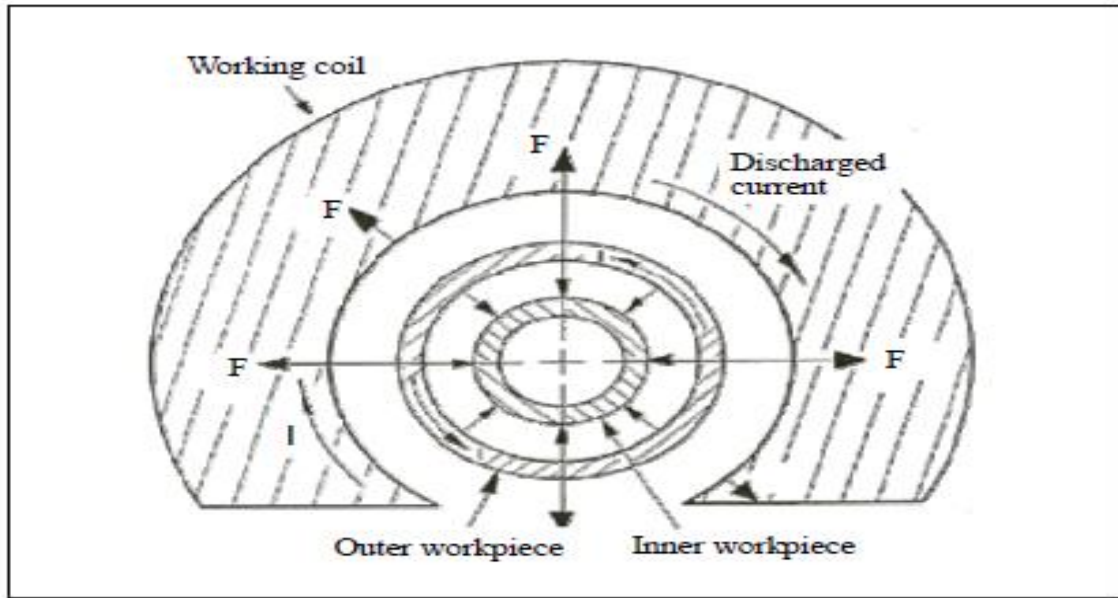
Principle of Electromagnetic welding [14]
